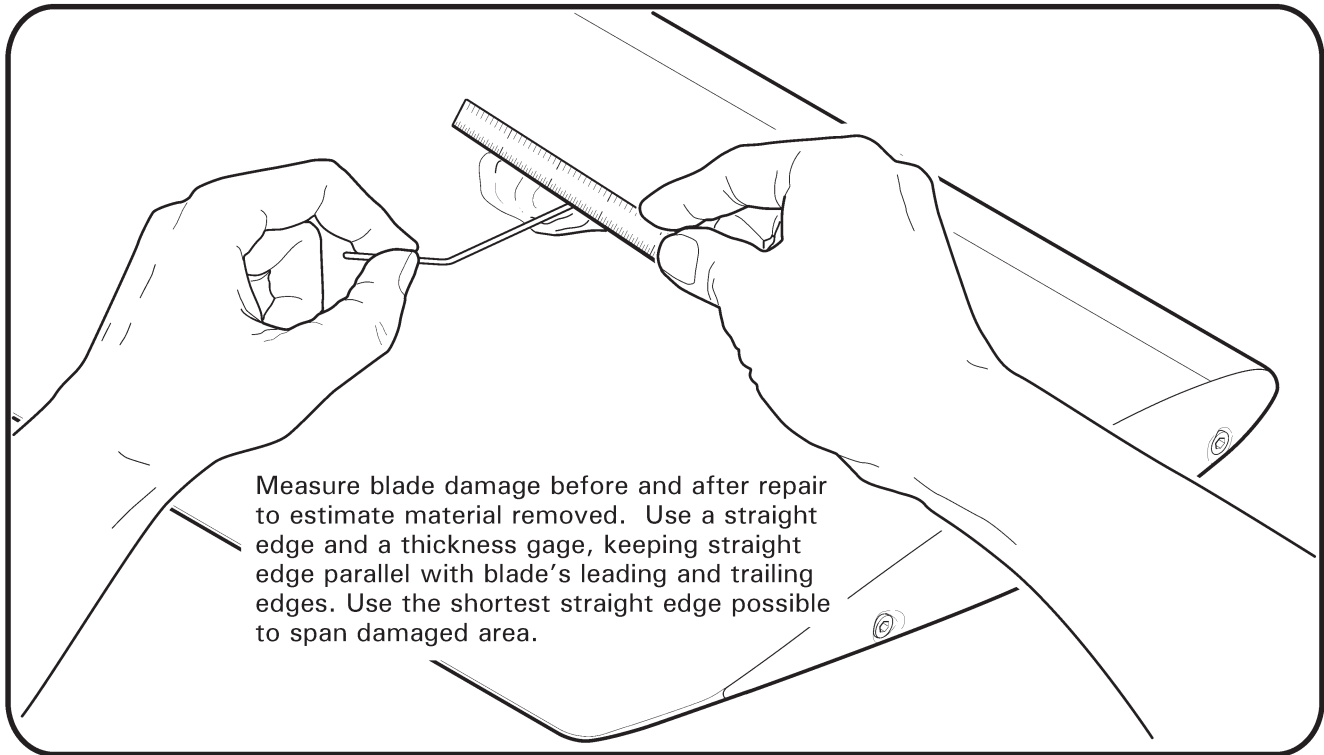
MEASURING MAIN ROTOR BLADE DAMAGE
